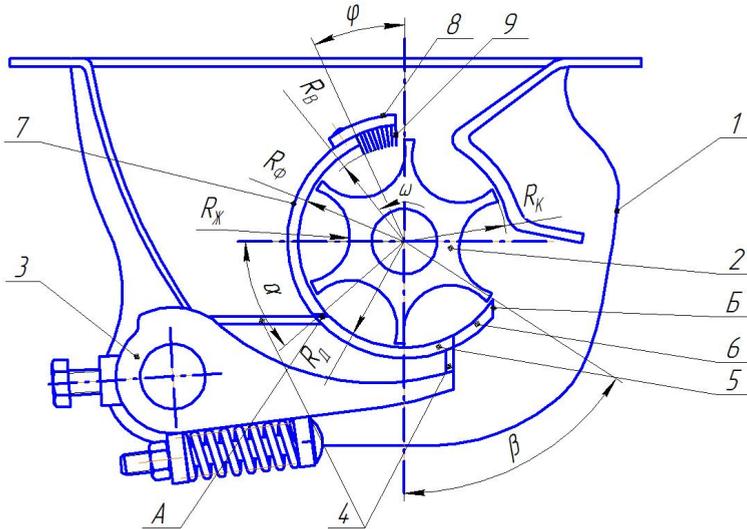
Scheme of the coil apparatus: 1 - housing; 2 - coil; 3 - valve; 4 - support; 5 - bottom; 6 - bevel; 7 - shaper-director; 8 - brush; 9 - pile; A - the front edge of the bottom; B - rear edge of the bottom
